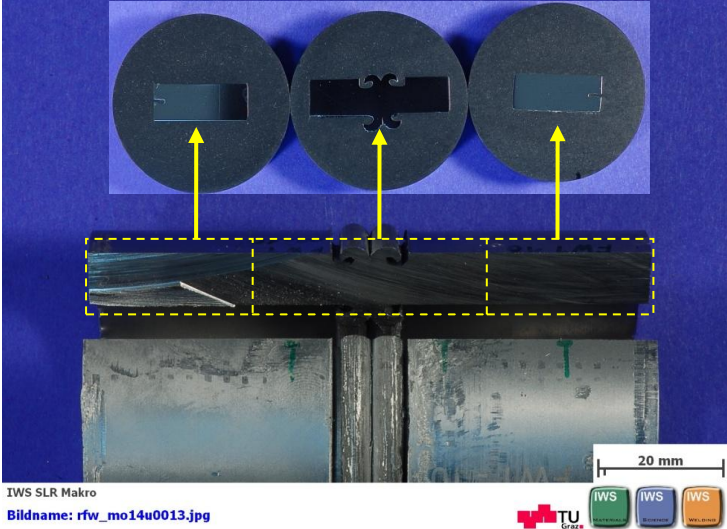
Sampling out of the welded part W-05 (same sampling for welded assembly W-08)
